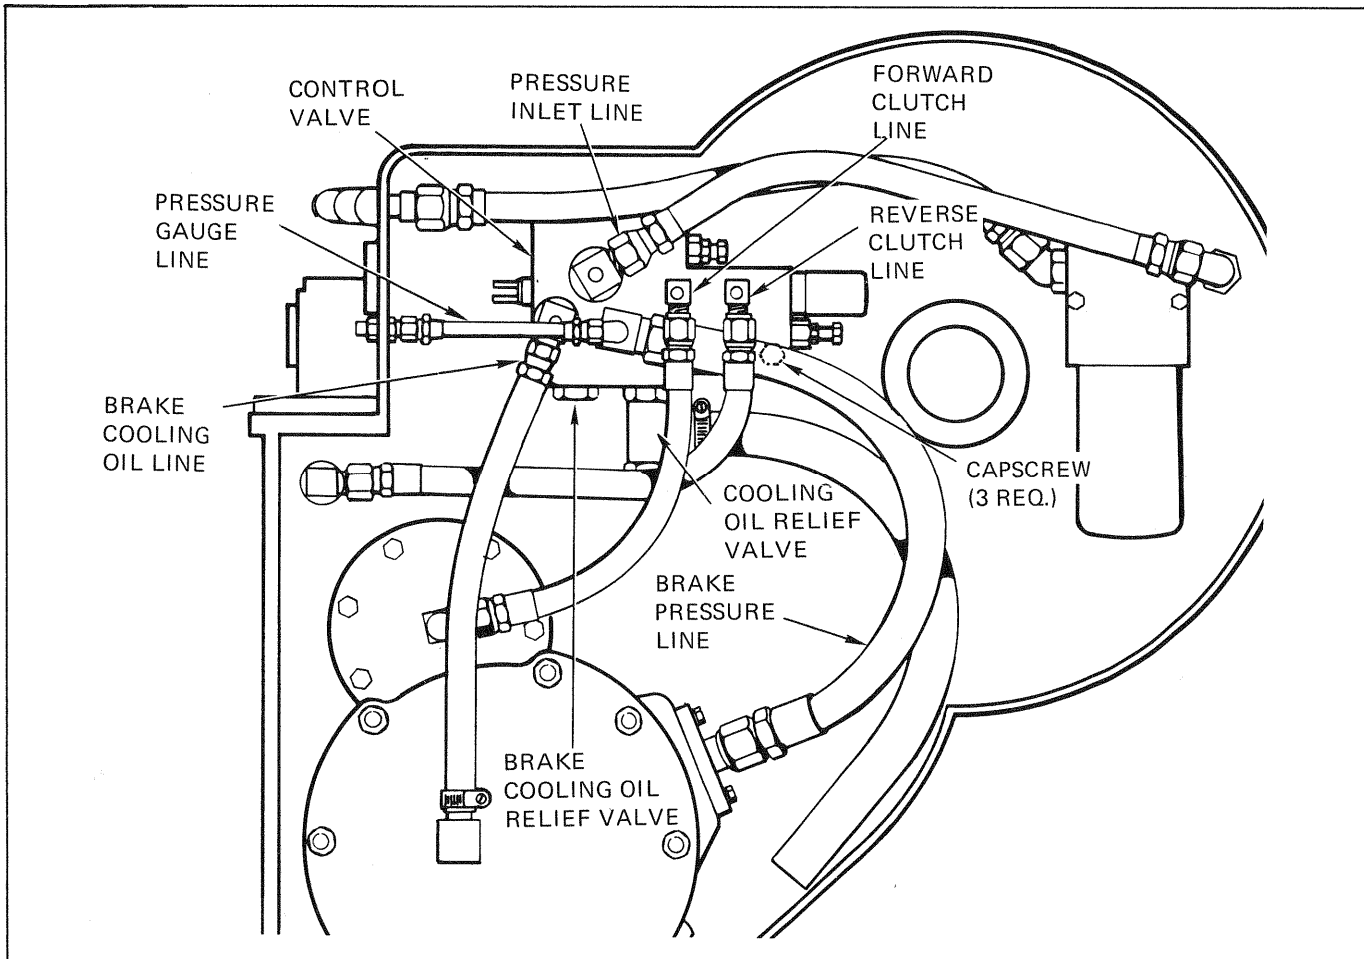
CONTROL VALVE REPAIR, POWER CONTROL WINCH (Sheet 1 of 2)
